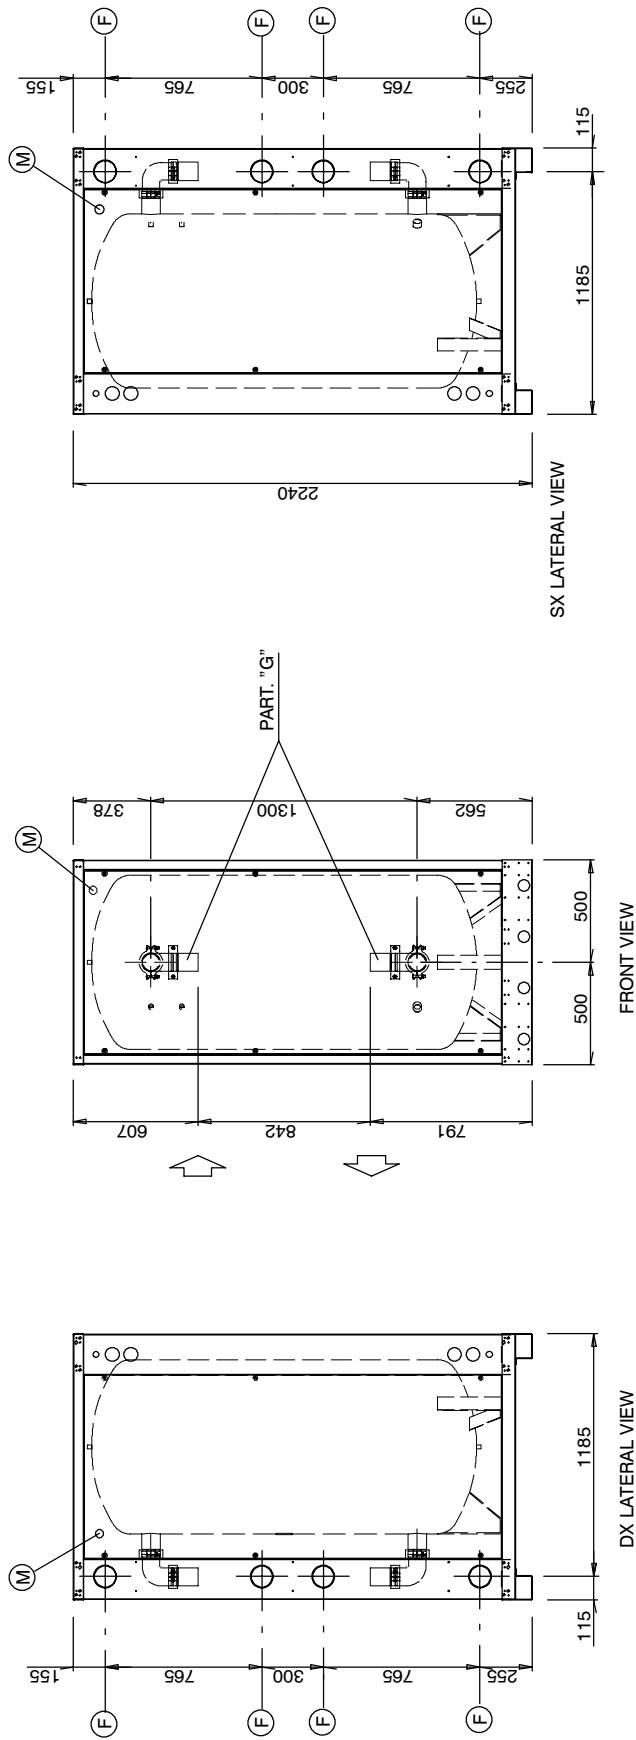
Tank Overall Dimensions (supply not mounted on unit)
